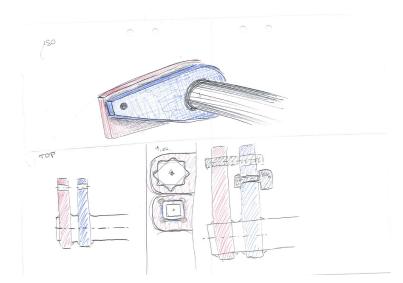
The further developed Extra arm concept with a locking pin between the stiff red arm and the softer blue arm. The stays attachment point is in the softer blue arm
